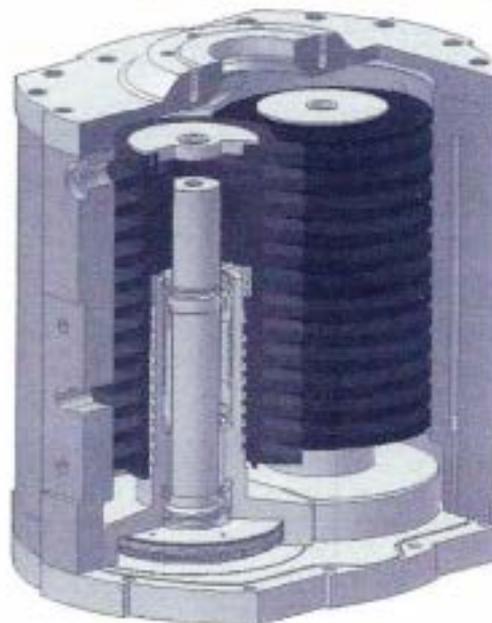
Dry-running screw-type vacuum pump of the type investigated (model test machine)
